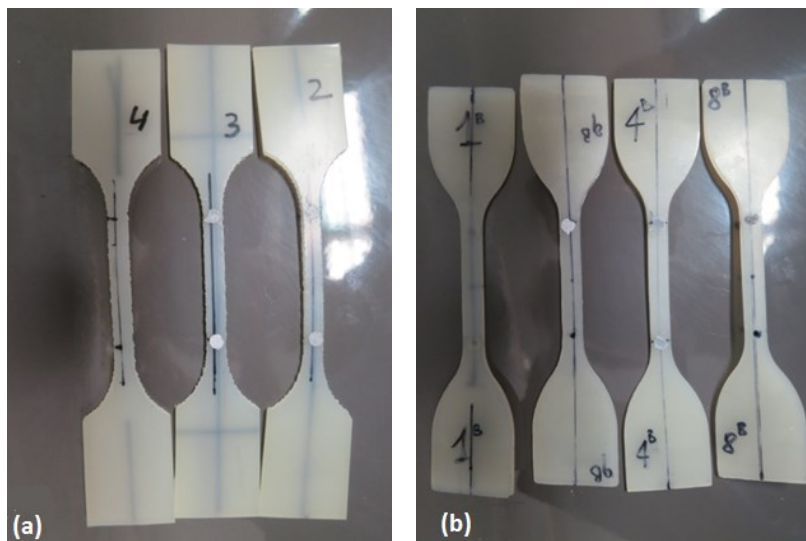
DESMOPAN bone shaped specimens, (a) hand-machined, (b) factory-molded.
